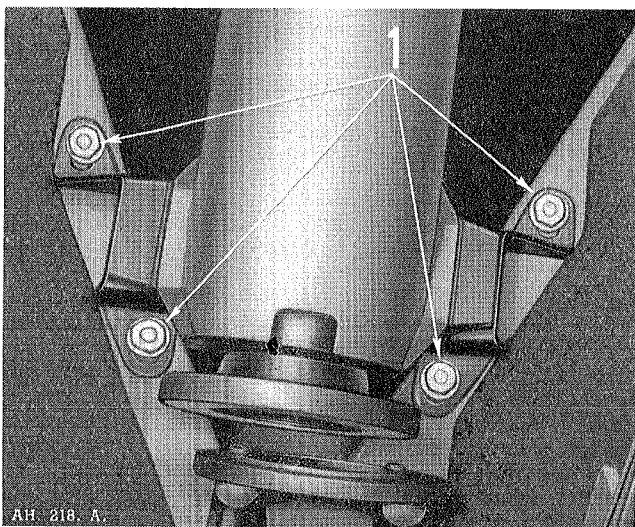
The gearbox rear upper securing bracket showing the four setpins at 1.
